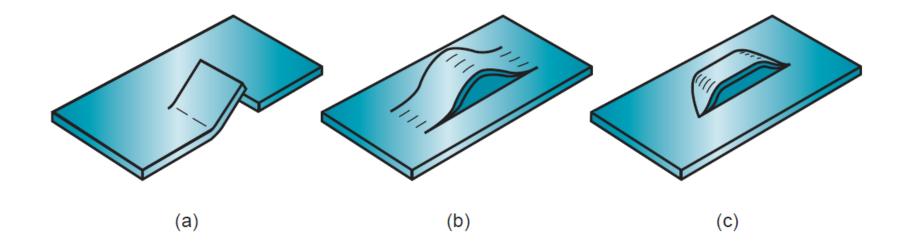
Lancing in several forms: (a) cutting and bending; (b) and (c) two ⁴⁹ types of cutting and forming.
